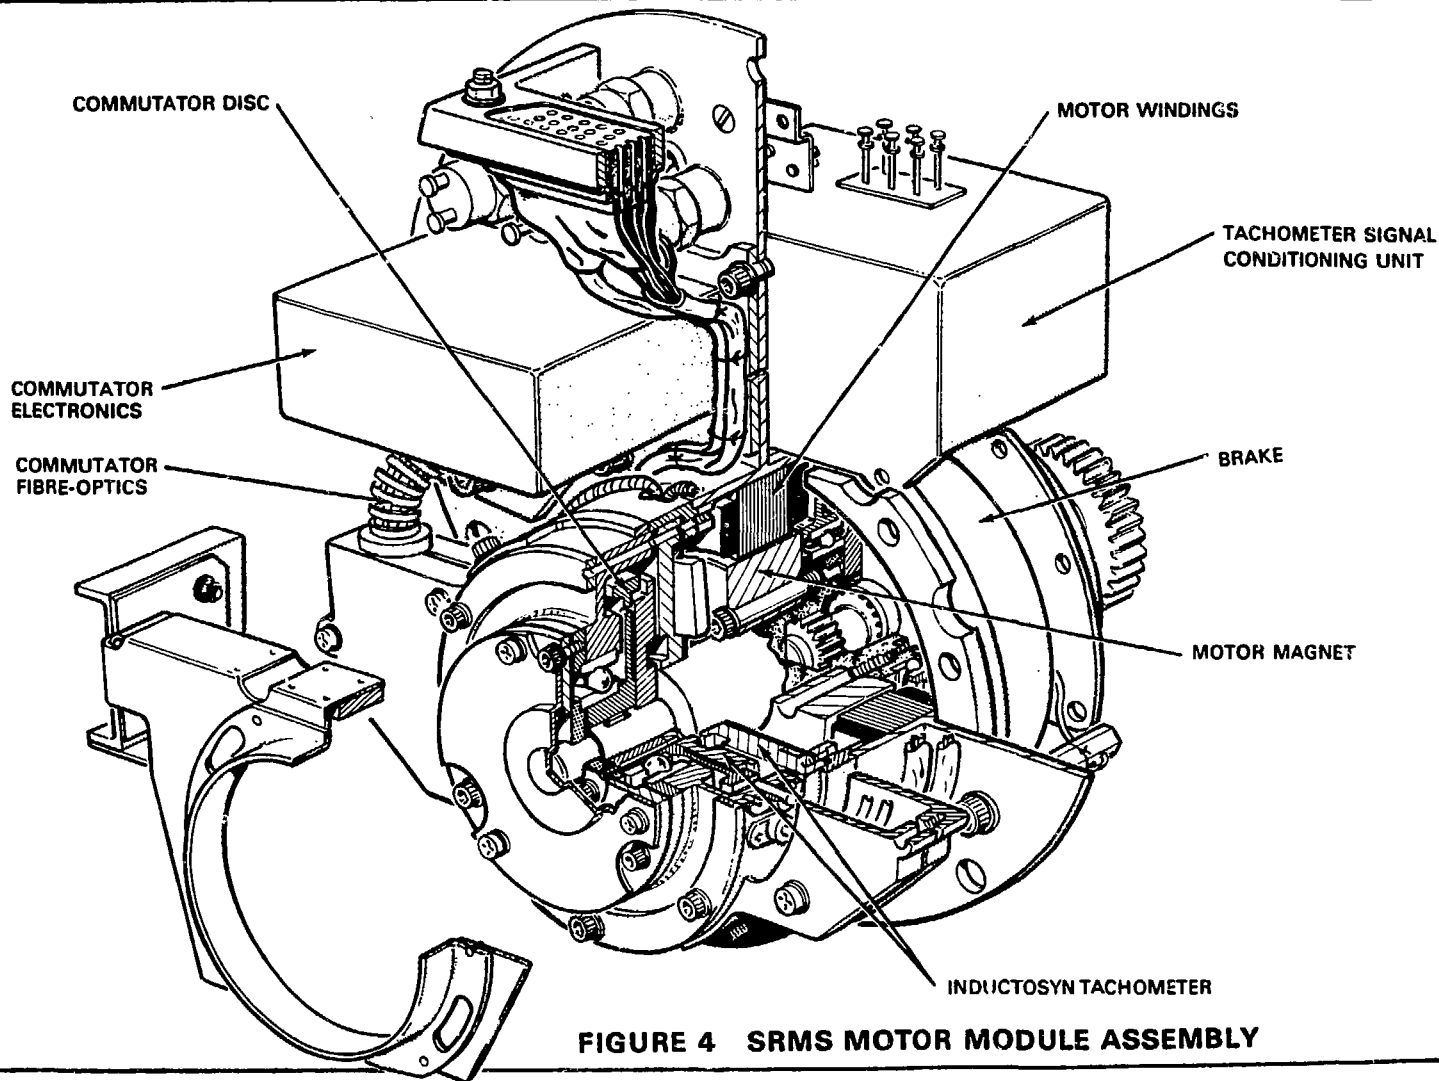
SRMS MOTOR MODULE ASSEMBLY
